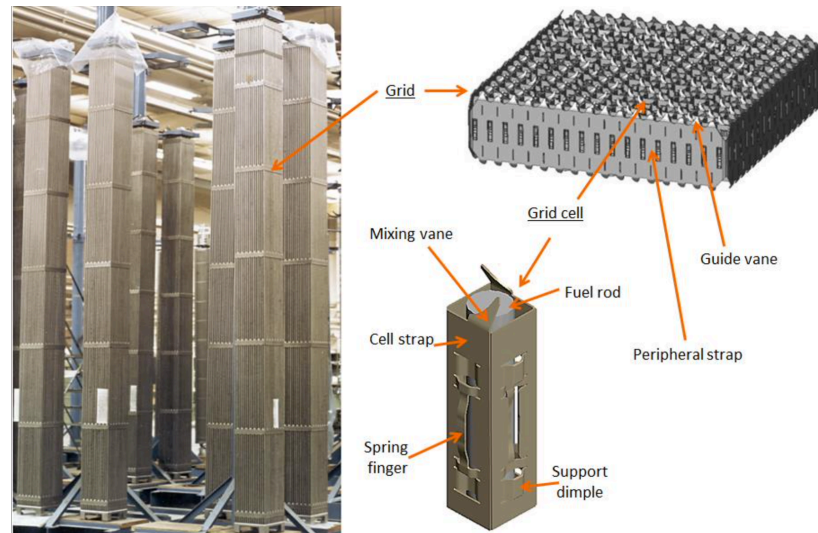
PWR Fuel Assembly and the Spacer Grid set [53]
